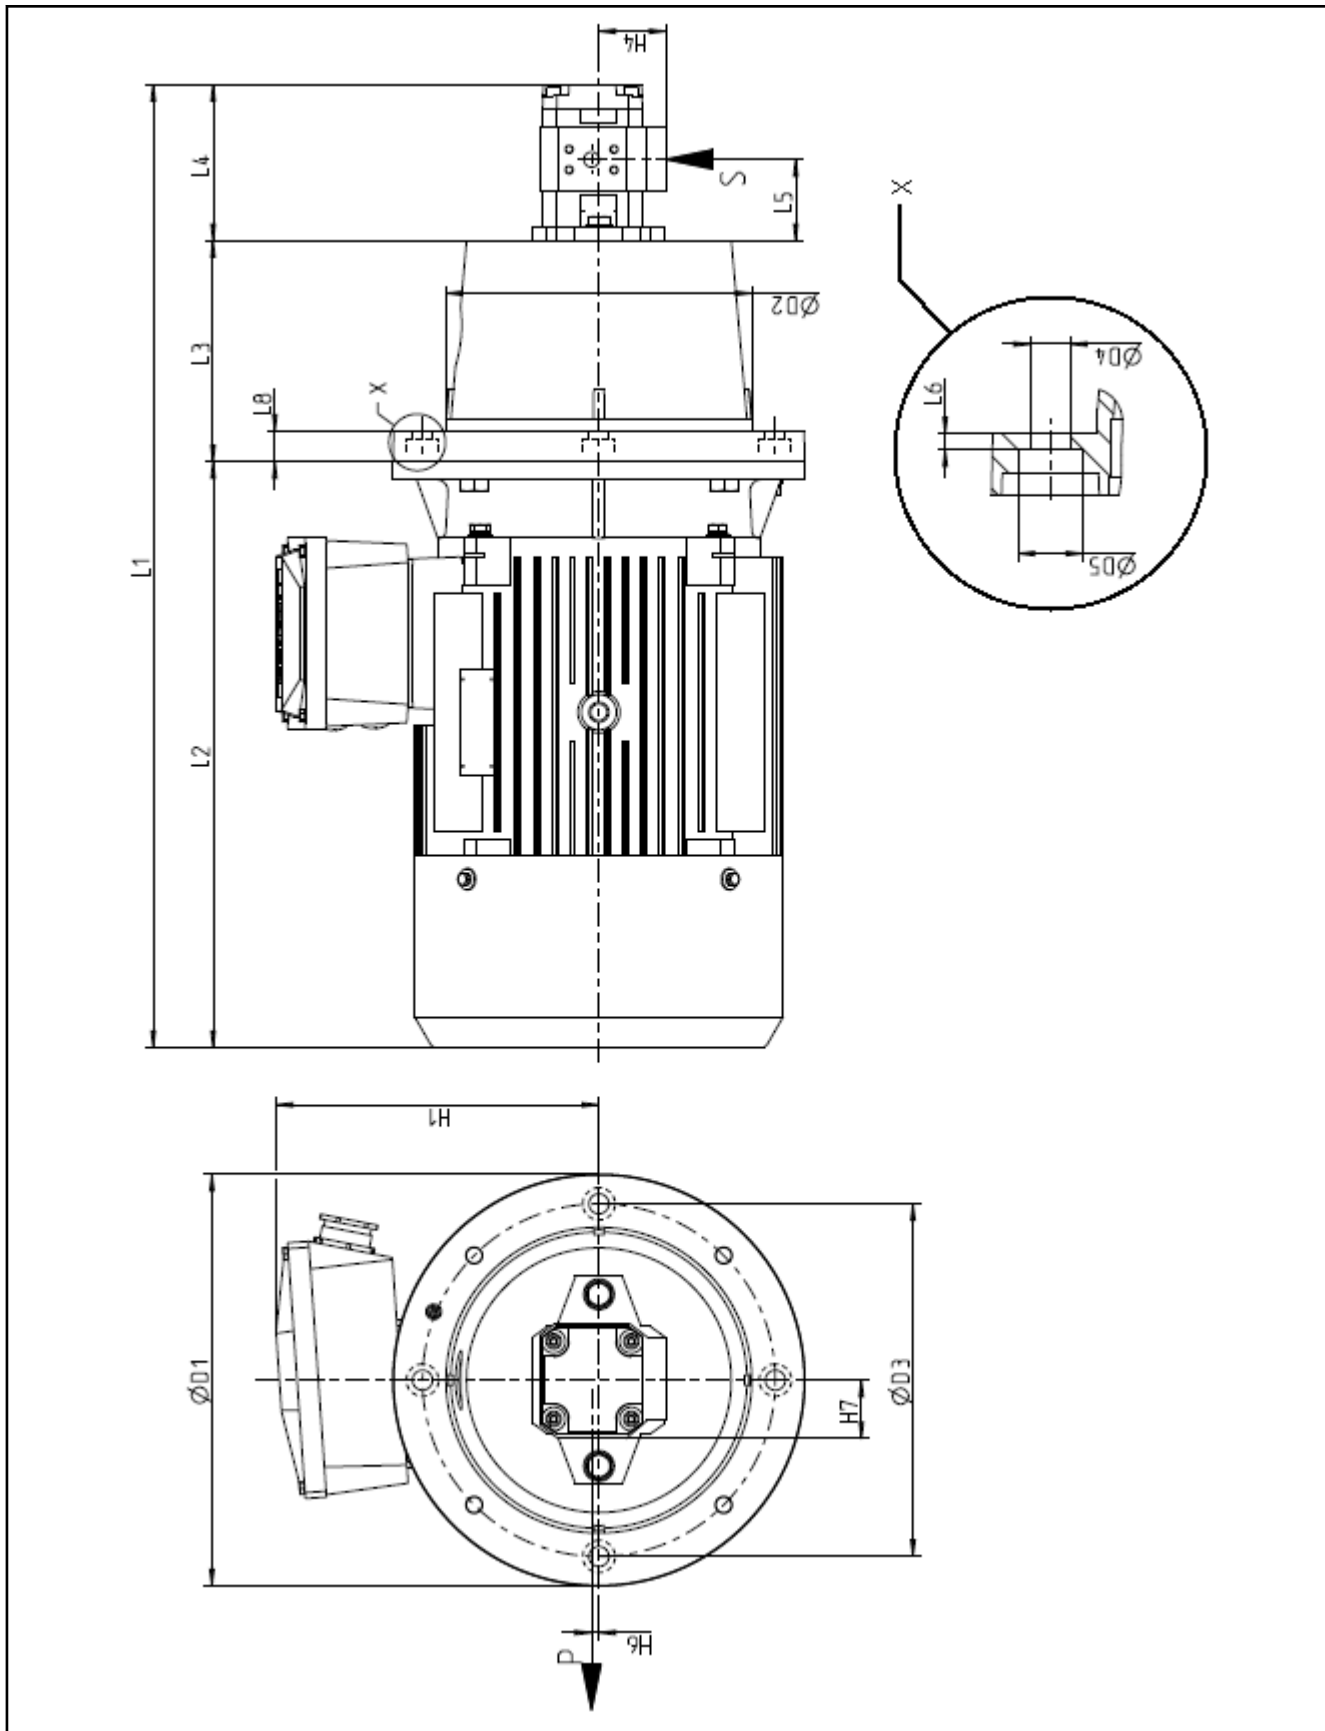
Dimension sheet "MPES2" with "PGH3" in the fastening mode "V" (vertical flange fastening, without foot)
